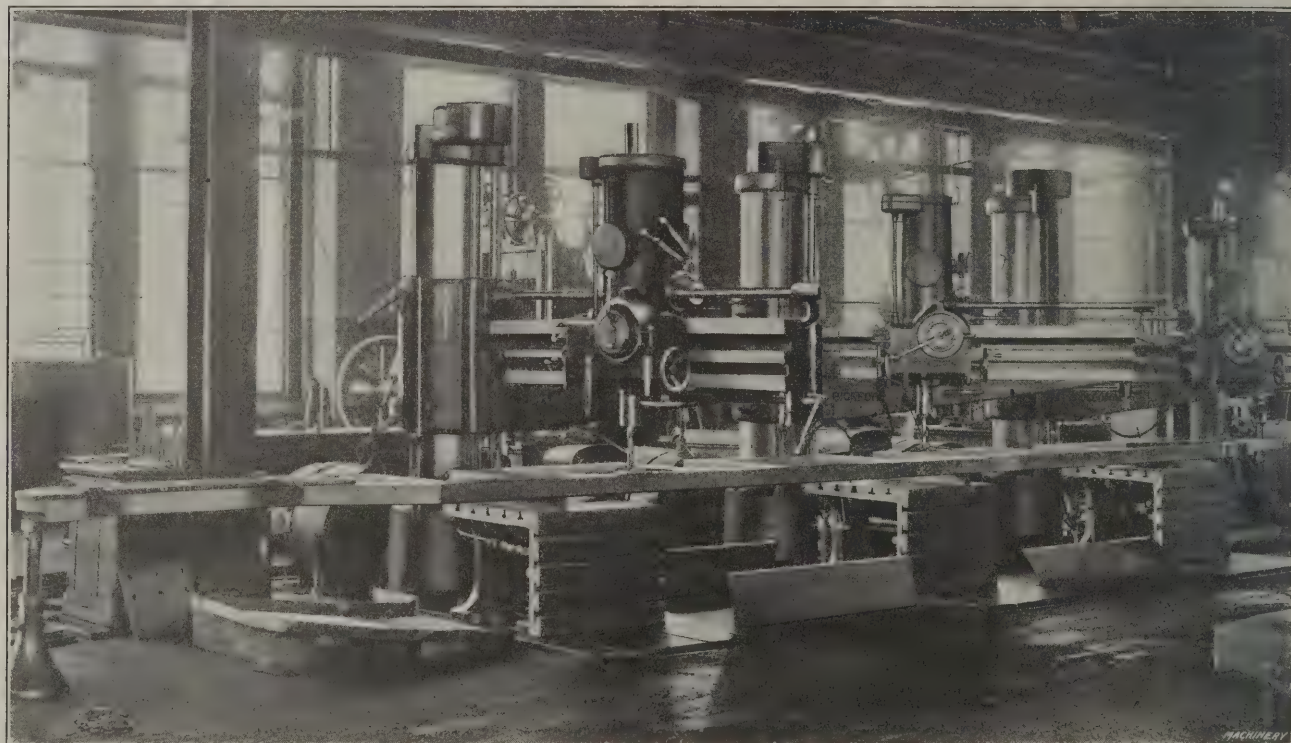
Gang of Three Radial Drilling Machines used for Locomotive Frame Work
